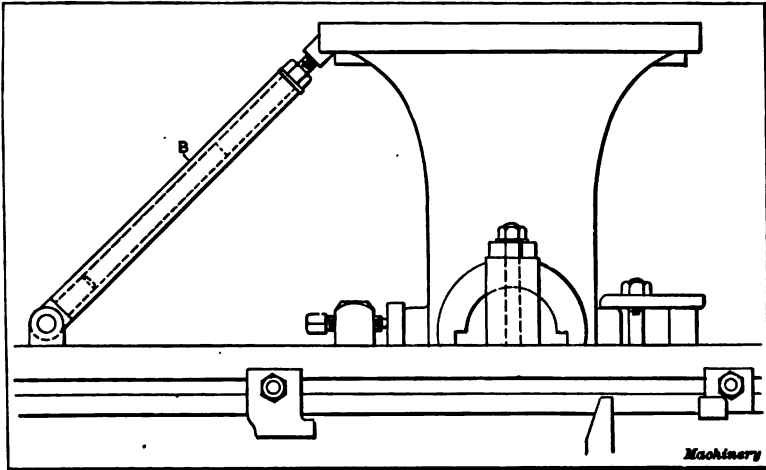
High Casting supported by Brace which takes Thrust of Cut
